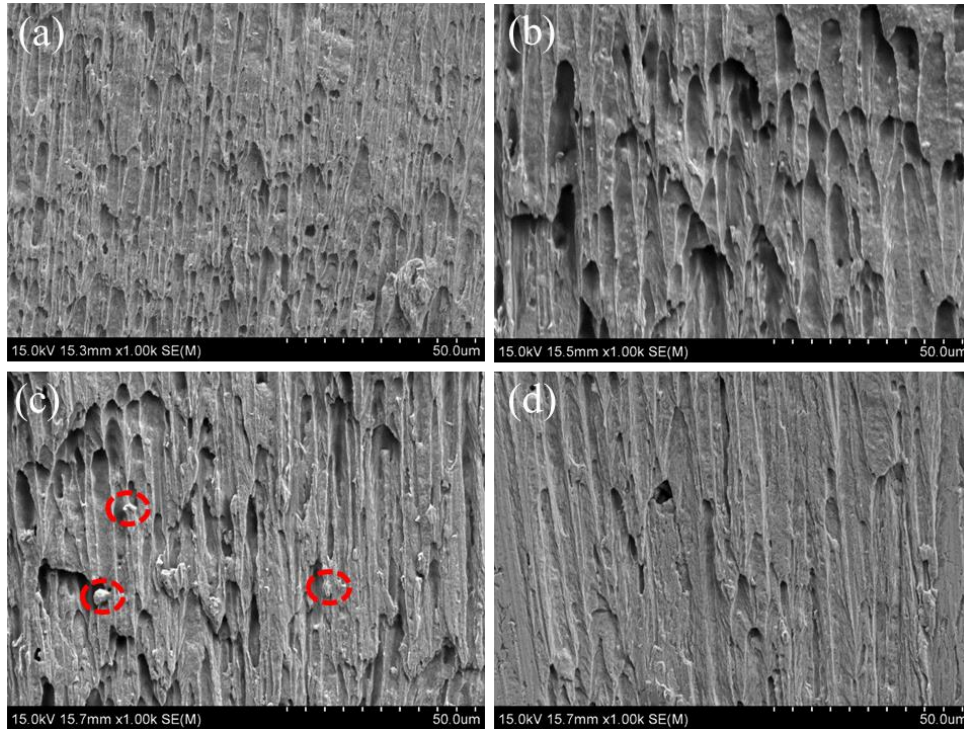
Fracture surfaces of plain Sn1.0Ag0.5Cu solder joint with different thermal aging times. (a) 0 h, (b) 168 h, (c) 504 h, (d) 1008 h.
